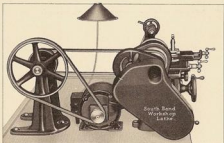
VIEW OF LATHE FROM HEADSTOCK END.
